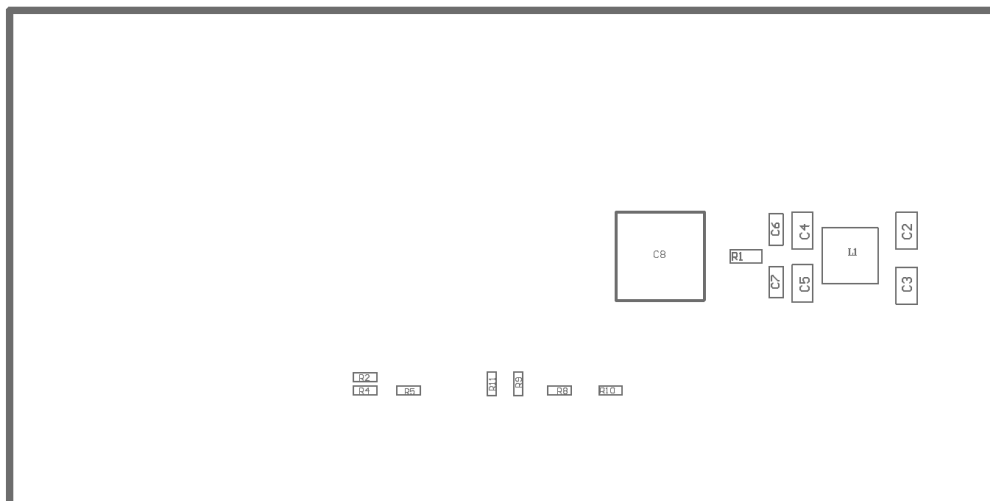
Bottom Assembly (Bottom View), LM64460EVM-2MHZ
